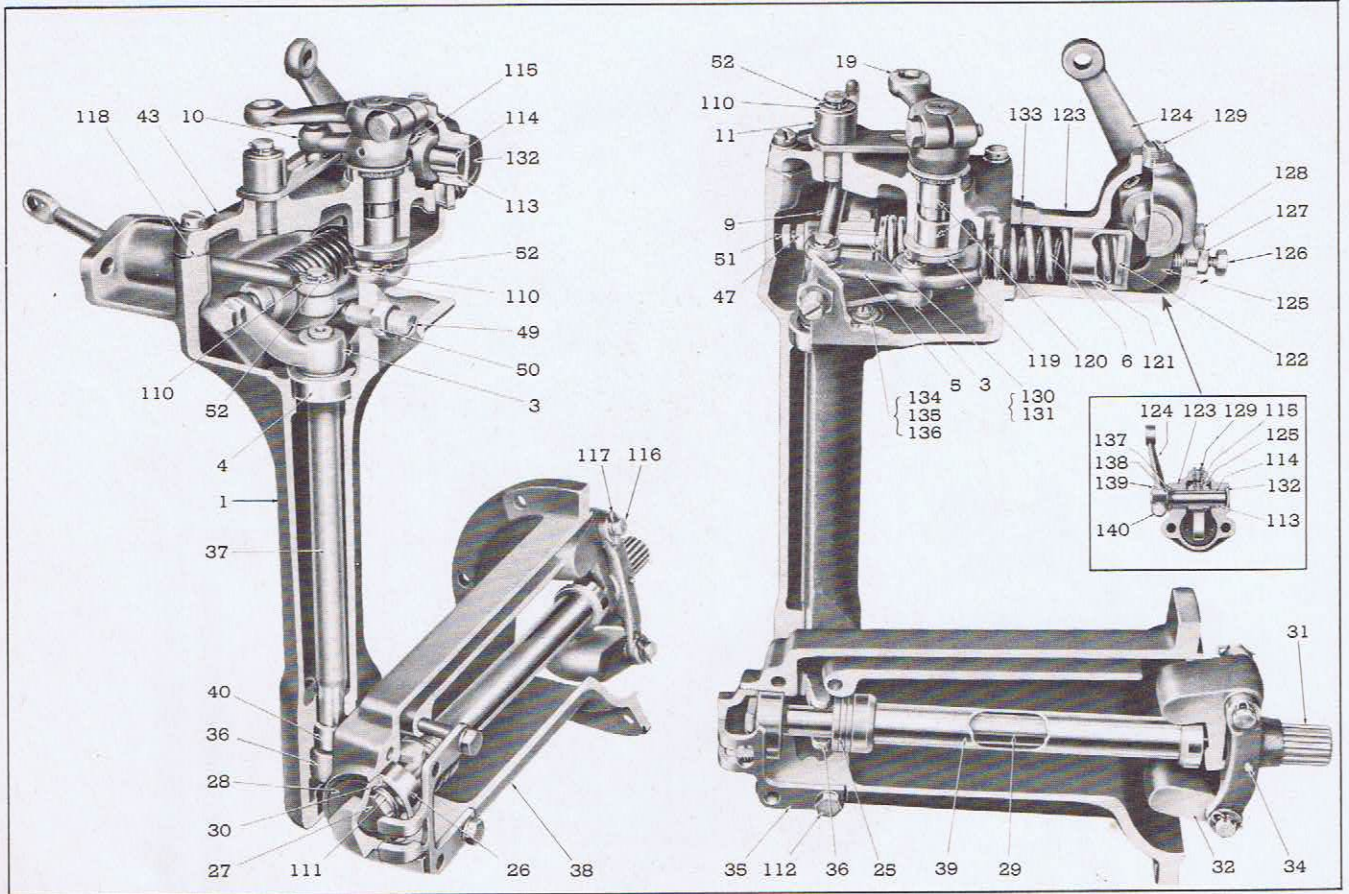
VARIABLE SPEED GOVERNOR ASSEMBLY.
